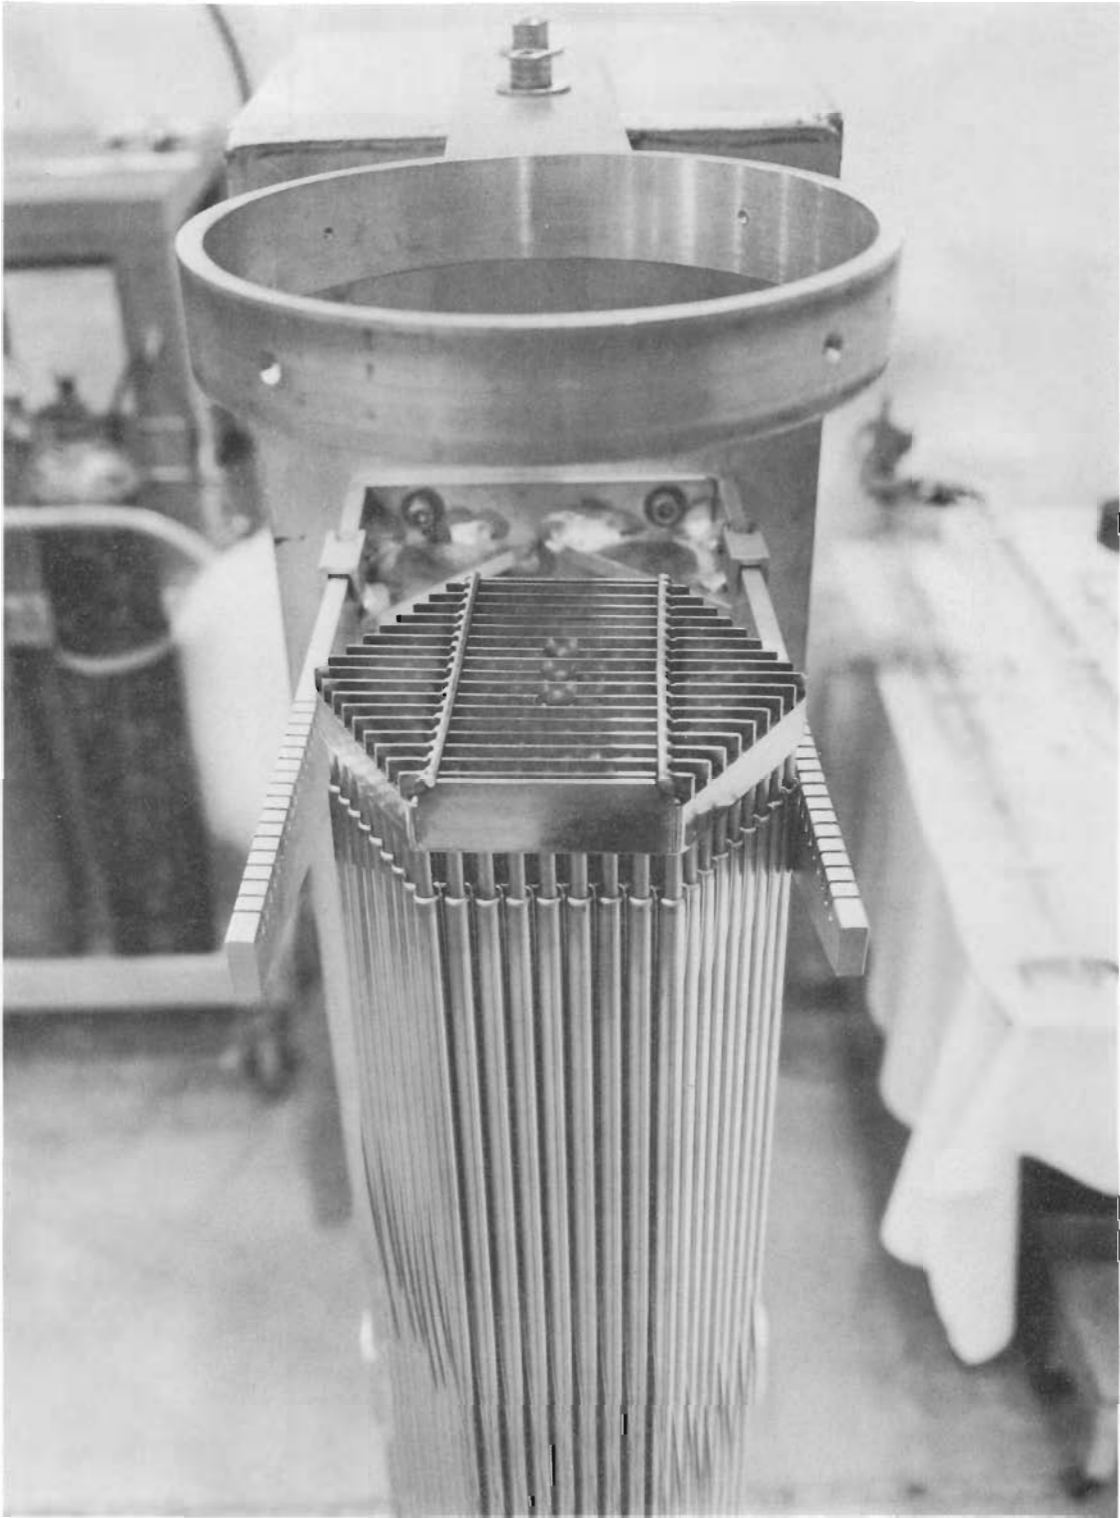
Placing Top Grid Assembly on Fuel Pin Bundle
